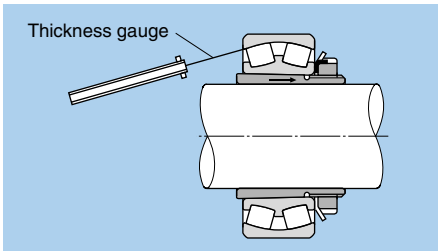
Measuring Internal Clearance of Self-Aligning Roller Bearings
